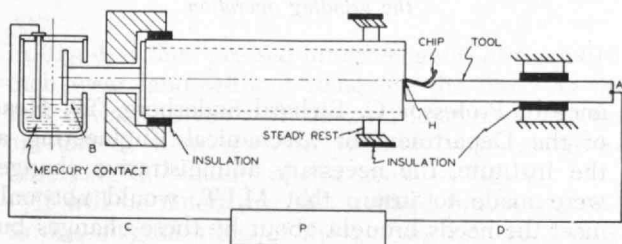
If the work to be cut and the cutting tool are insulated from the machine, the dissimilar metals at the cutting point, H, may be used as a thermocouple to determine tool chip temperatures.
